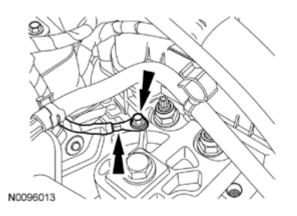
Locating A/C Tube Nut And O-Ring Seal Courtesy of FORD MOTOR CO.
